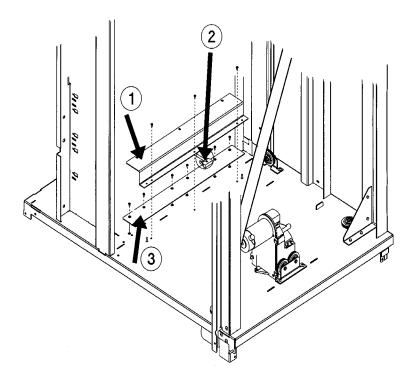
Vertical-Path-Clear Enclosure and Mounting Screws
